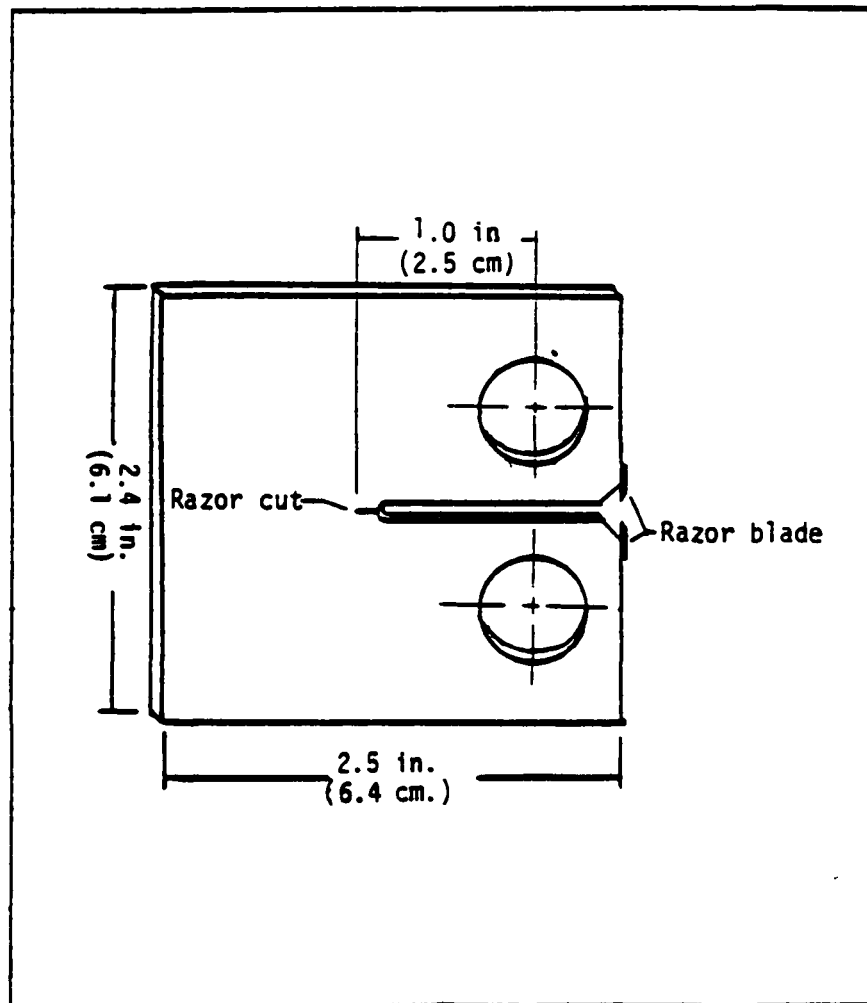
Schematic of the resin compact tensile test specimen for Mode I fracture toughness measurement.
